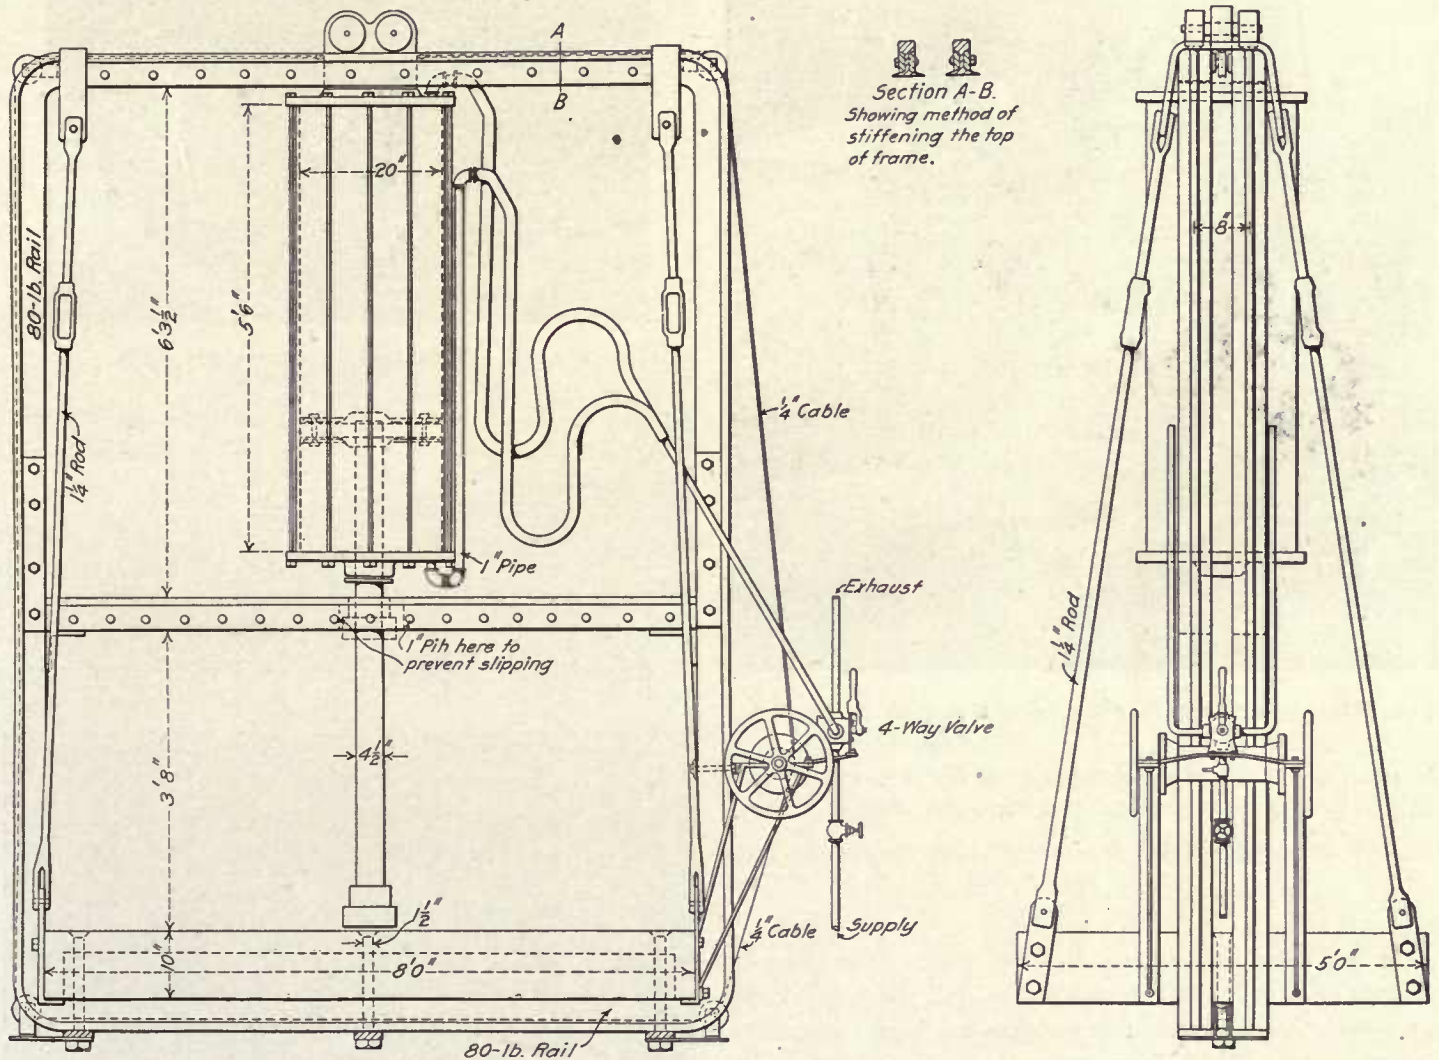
Air Press for Straightening Damaged Parts and Forming New Material.
